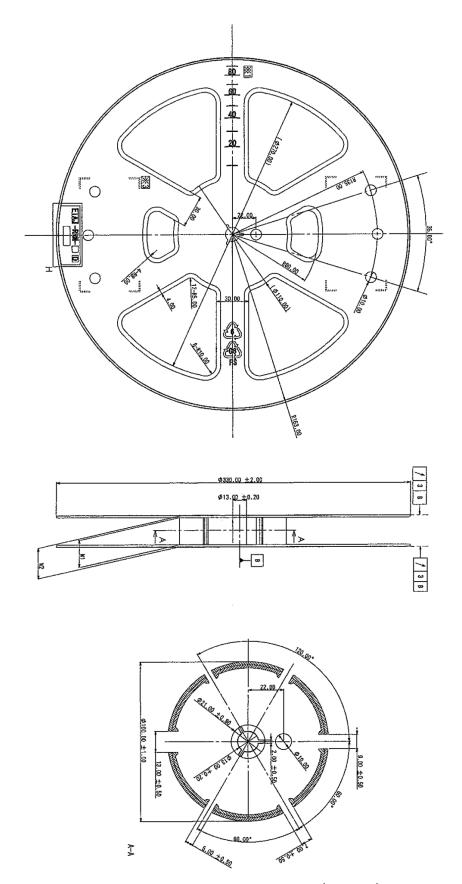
Packaging Reel Dimensions (Unit: mm)
